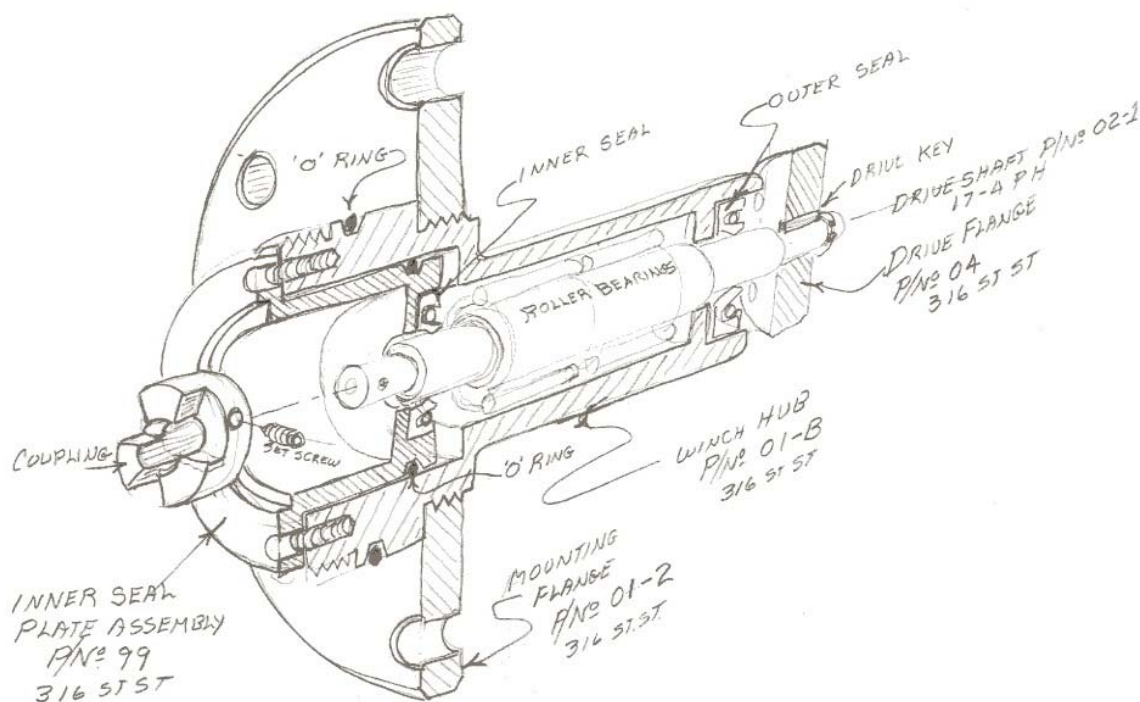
Schematic of the winch shaft, housing, end flange and bale coupling.
